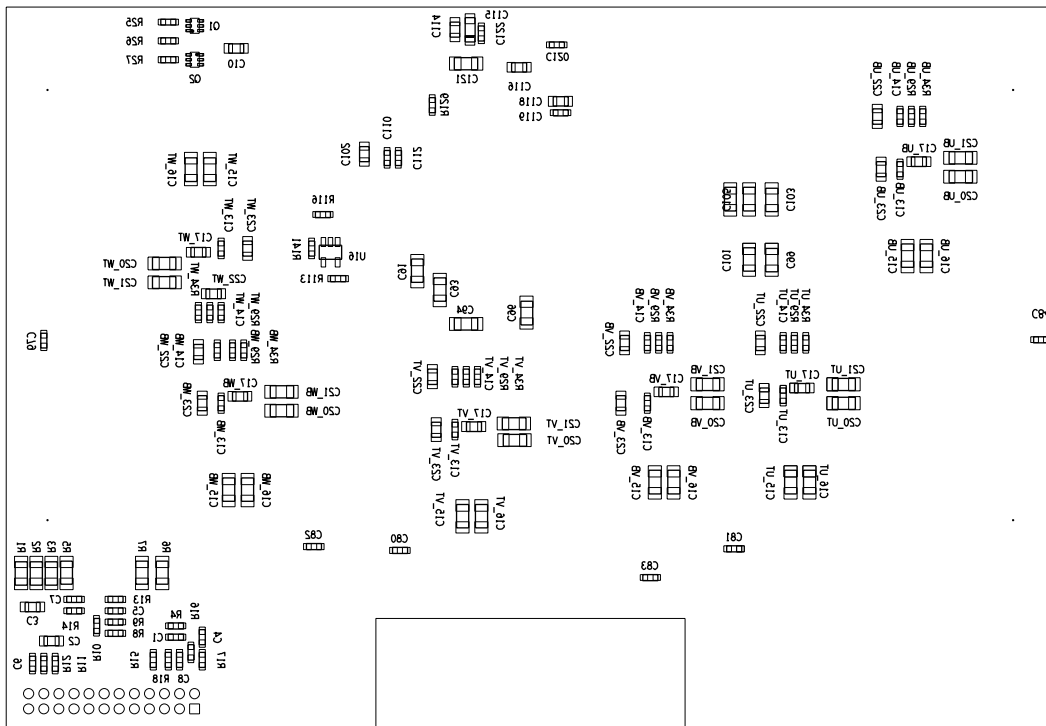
Assembly drawing of the HybridPack1™ driver board (bottom)
